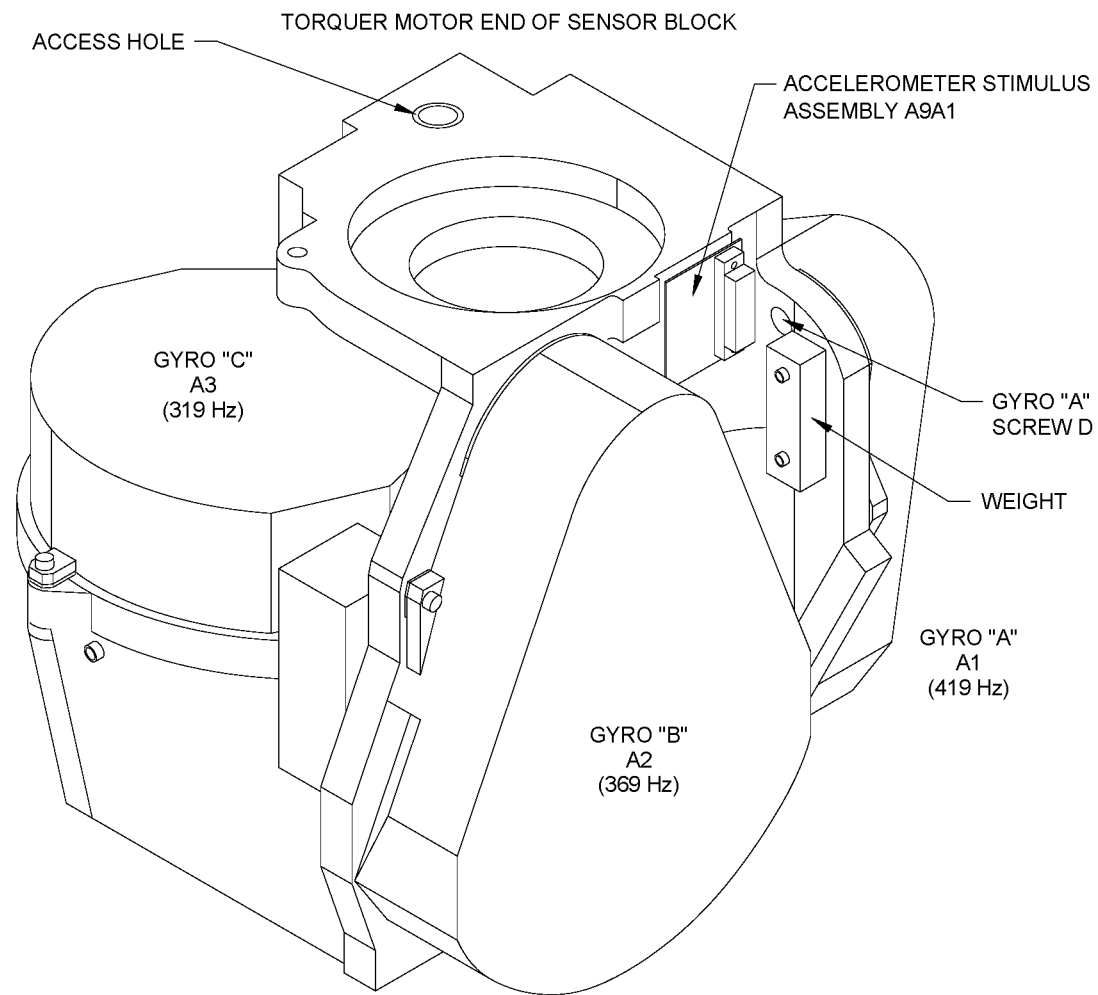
Gyro and Circuit Board Mounting Locations and Orientation
